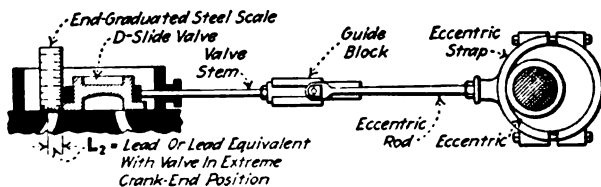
Determining L_2 —eccentric of a plain slide-valve engine in extreme crank-end position. (Exhaust port not shown.)
